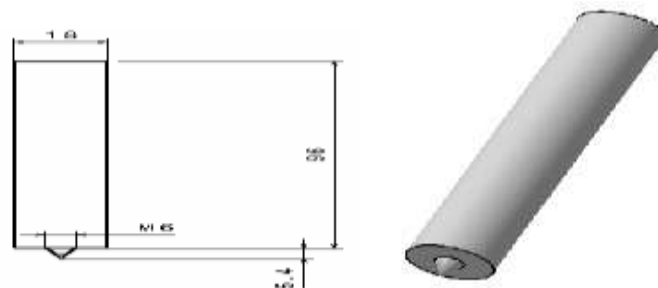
2D and 3D model of FSW tool with Threaded Conical Pin
